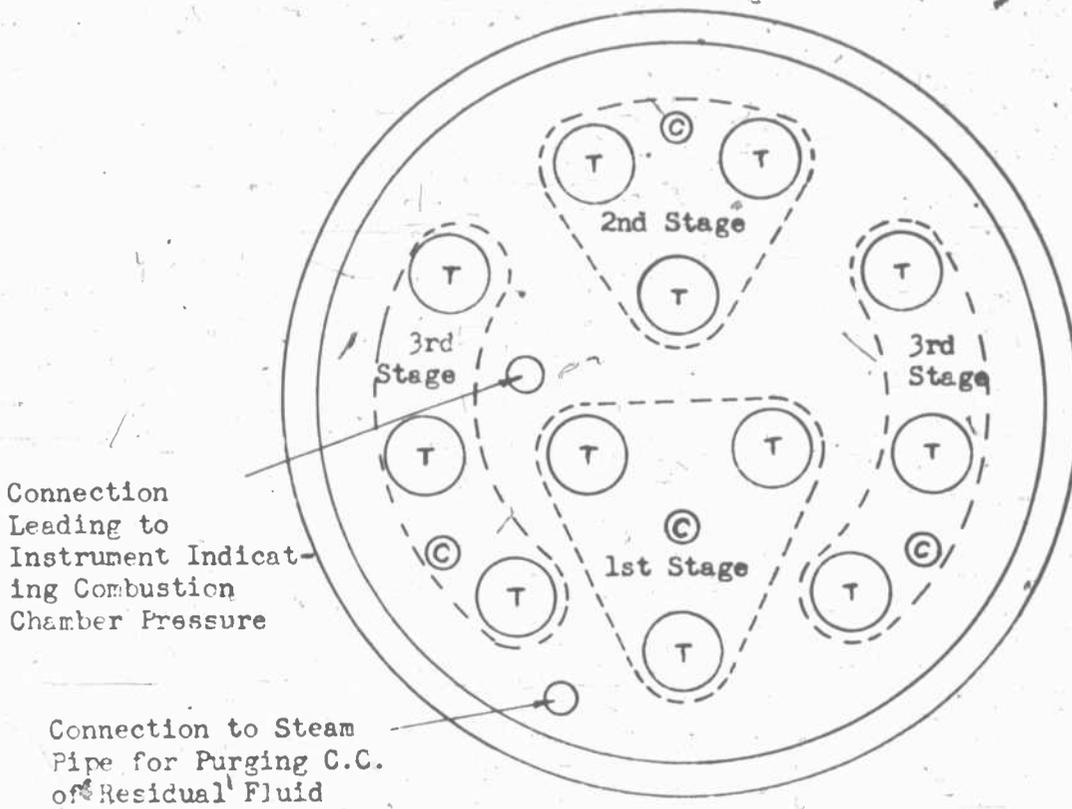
Combustion Chamber Burner Plate Showing Method of Zoning Burners into Three Separate Stages
